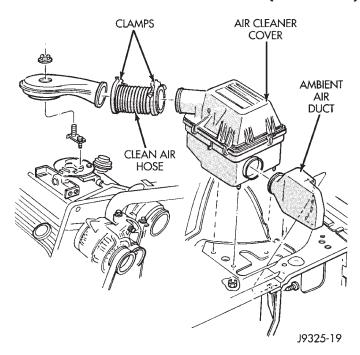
Air Cleaner—5.2L V-8 Engine Shown
